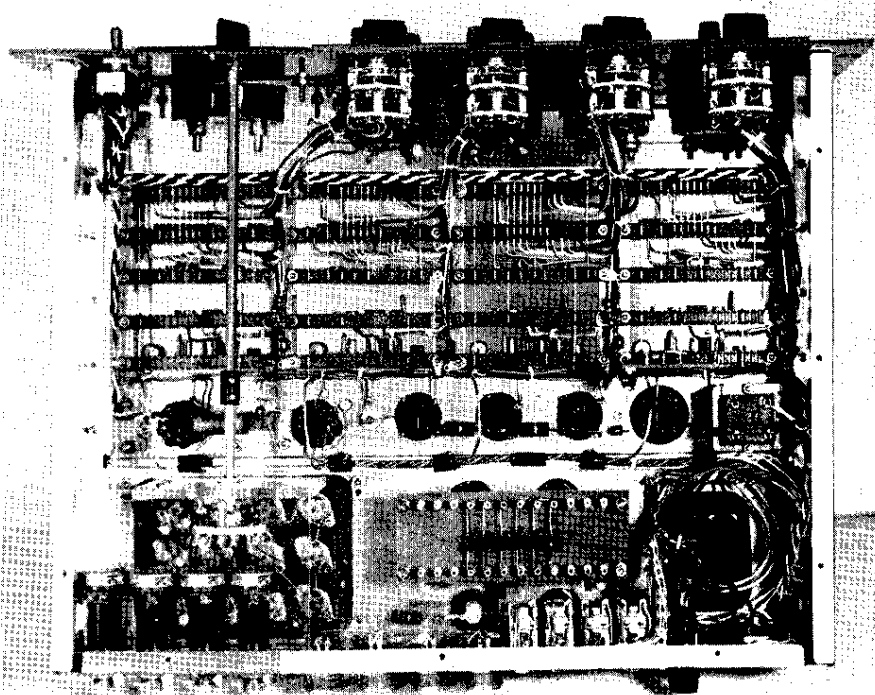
BOTTOM VIEW OF AIR MONITOR CHASSIS SHOWING CIRCUIT BOARD INTERCONNECTIONS
